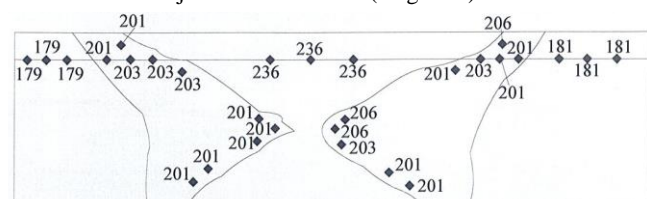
Scheme of hardness locations on a double butt-welded joint after PWHT (magn. 2×).
